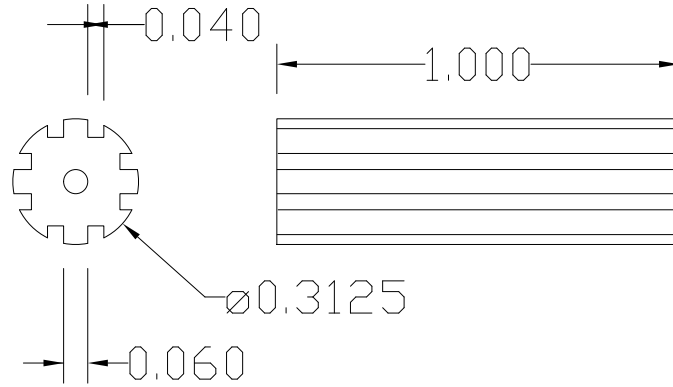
A drawing of the bobbin used for the three axes probe.
